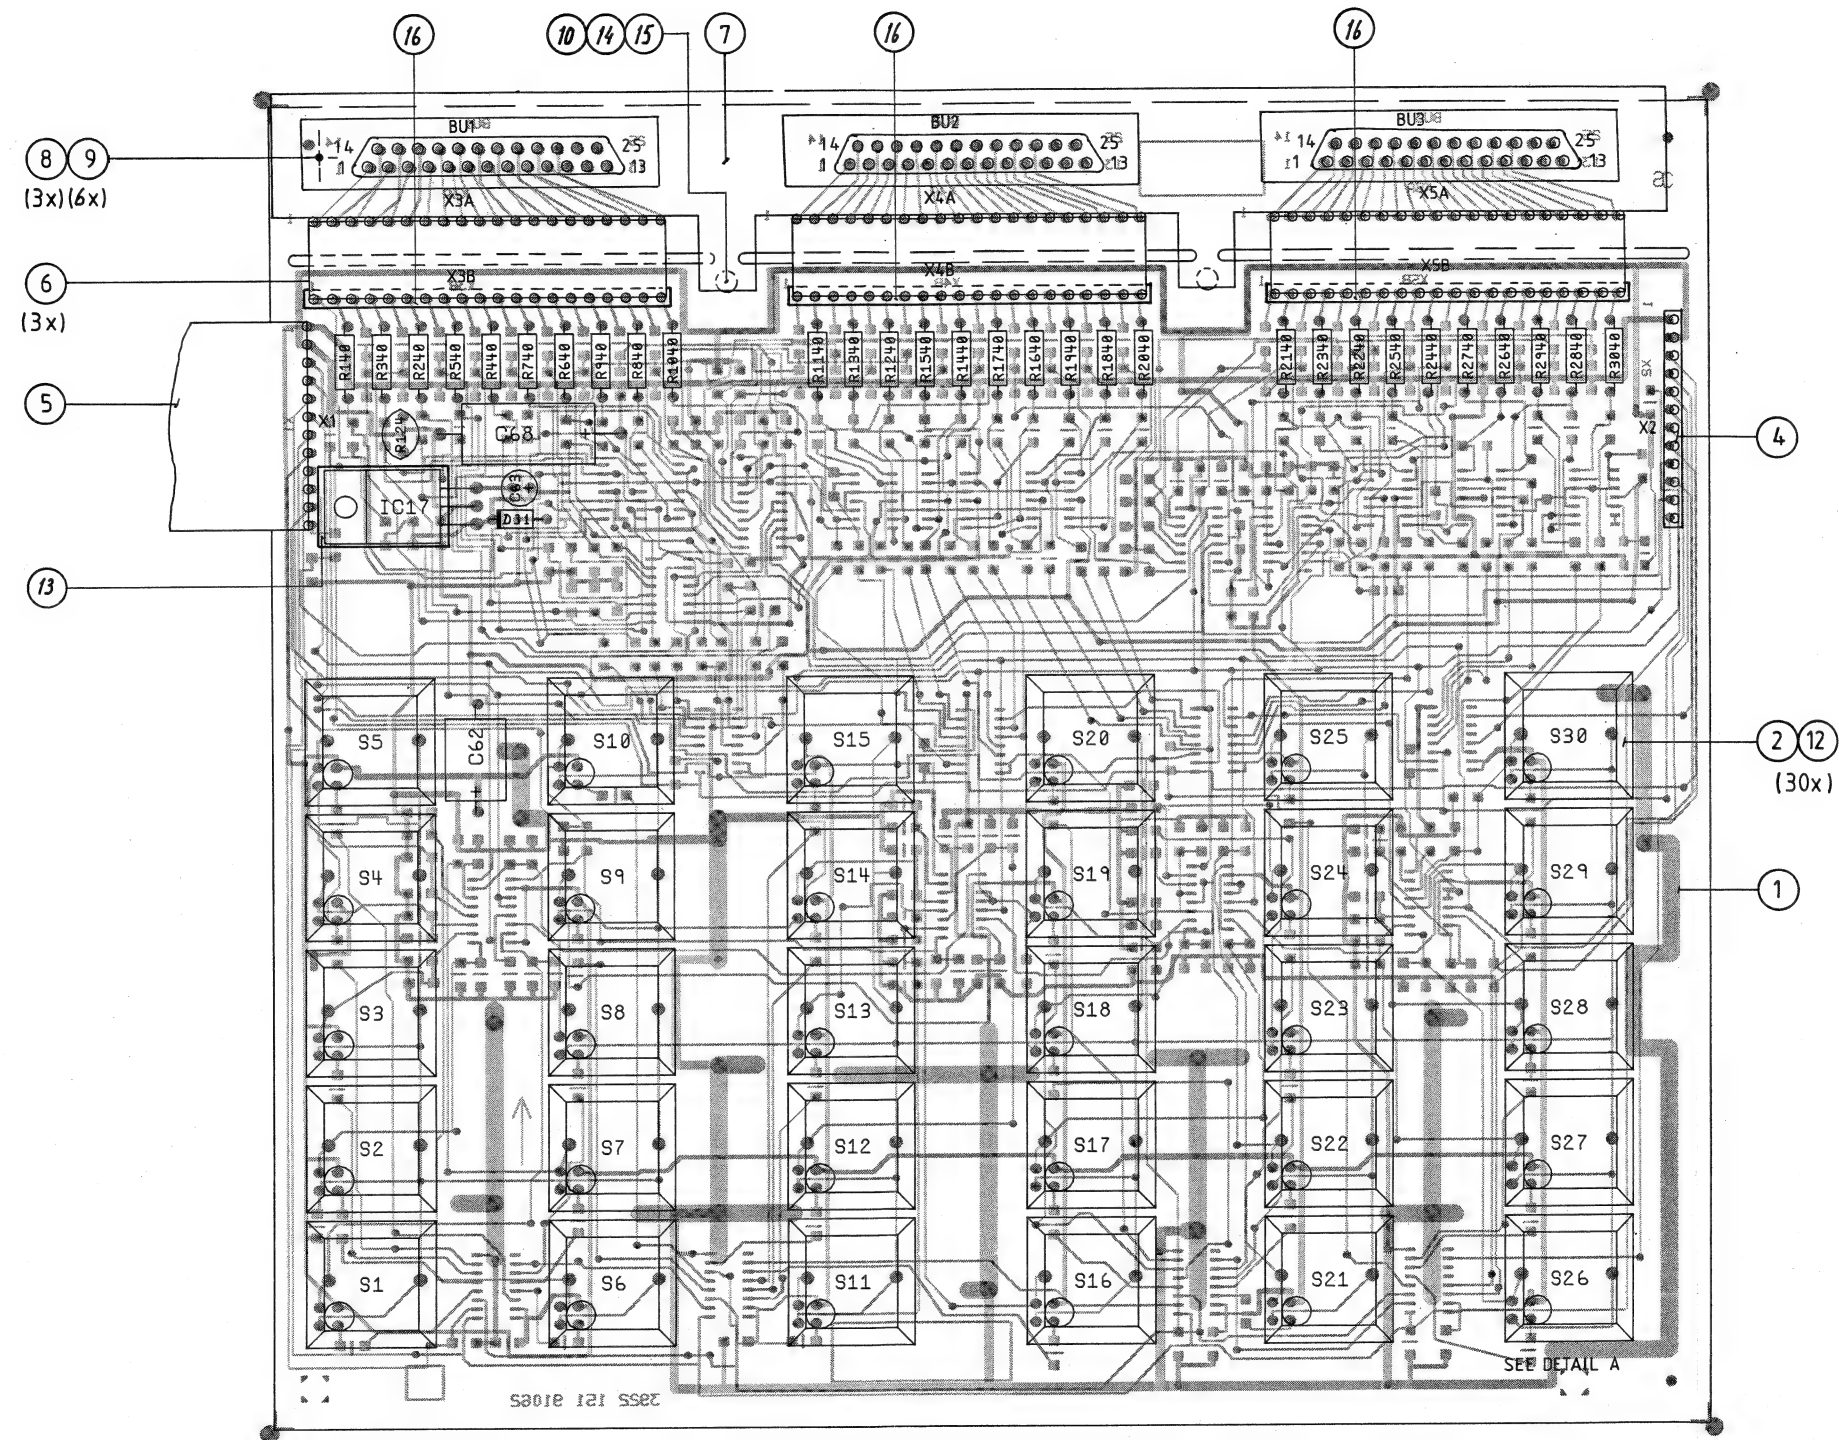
ASSEMBLY DIAGRAM OF I/O/SWITCH BOARD. TOP SIDE
